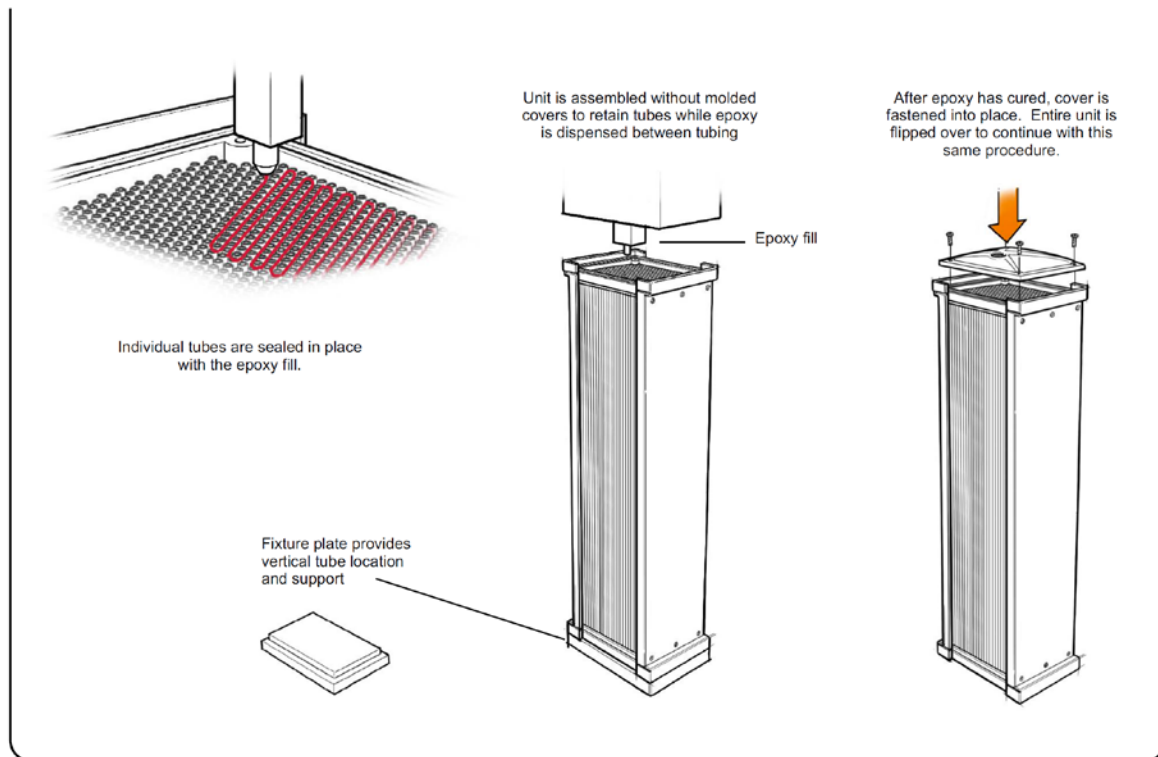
TMC module assembly details (automated adhesive distribution)
